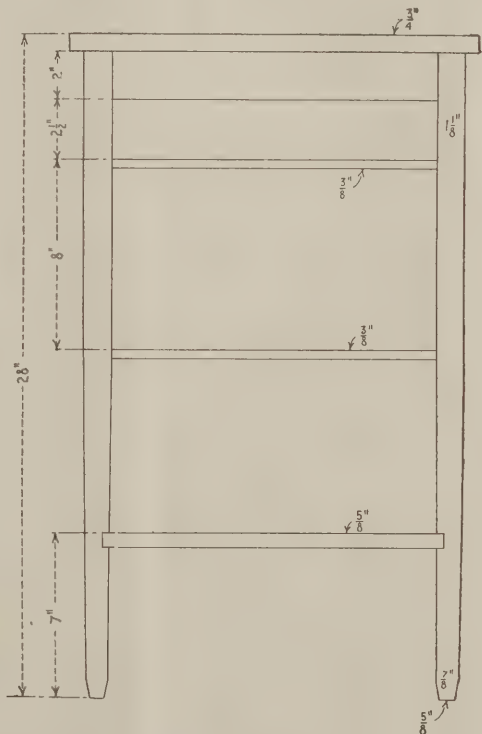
Side Elevation. Scale $1\frac{1}{2}$ In. to the Foot
